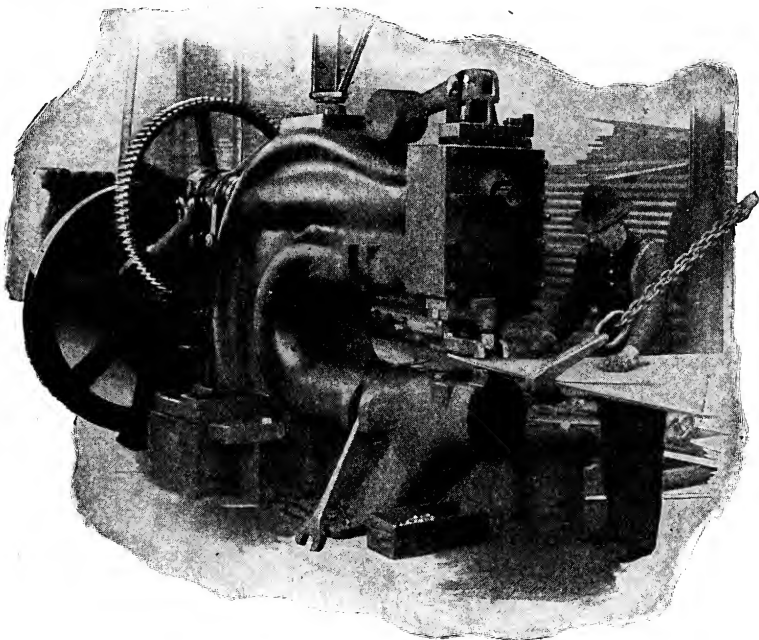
,247.—Punch at work centering rivet holes. These holes are centered by $1\frac{1}{16}$ -inch punched holes, and afterward drilled to finished size with a twist drill.
